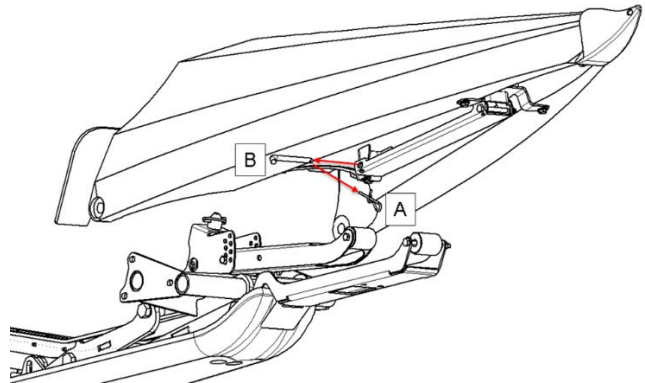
Adjustable Skid Shoe Stalk Deflector
